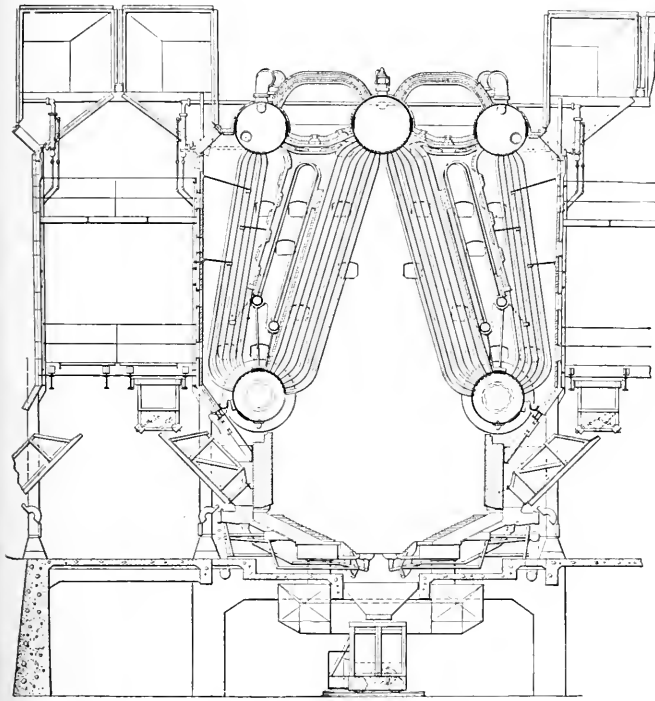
SECTION THROUGH ONE OF THE BOILERS HAVING 10,000 Sq.Ft. OF HEATING SURFACE
